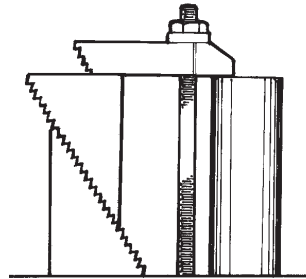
The blocks can also be stacked as shown to hold very tall parts. (A long piece of 10-32 threaded stock will be required.)
